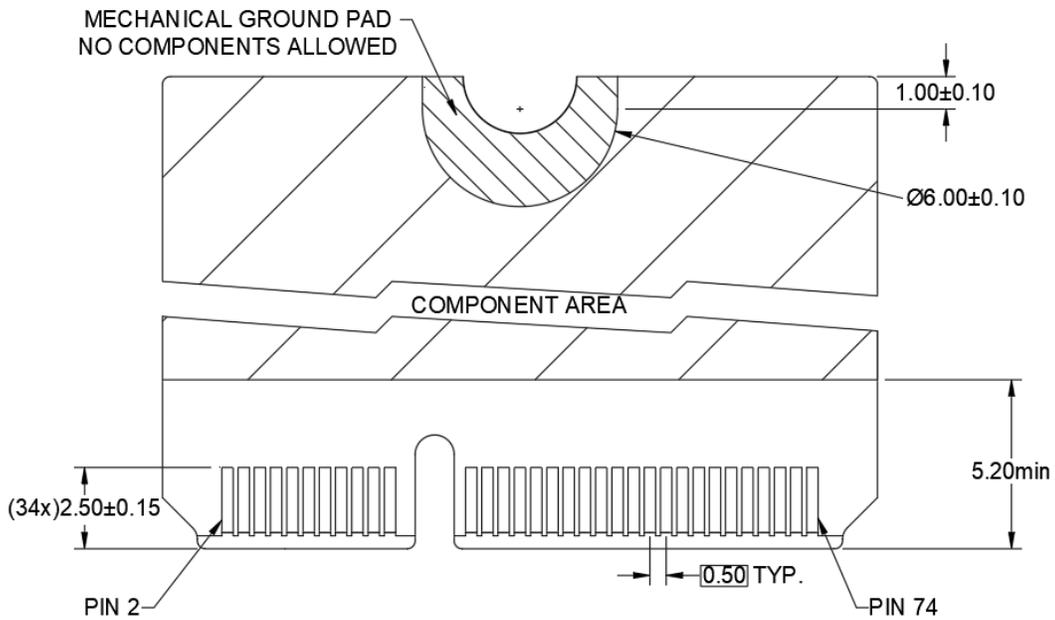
M.2 22XXX-XX-X-1A(A, B, C, D) Card Edge Outline Bottom-side
